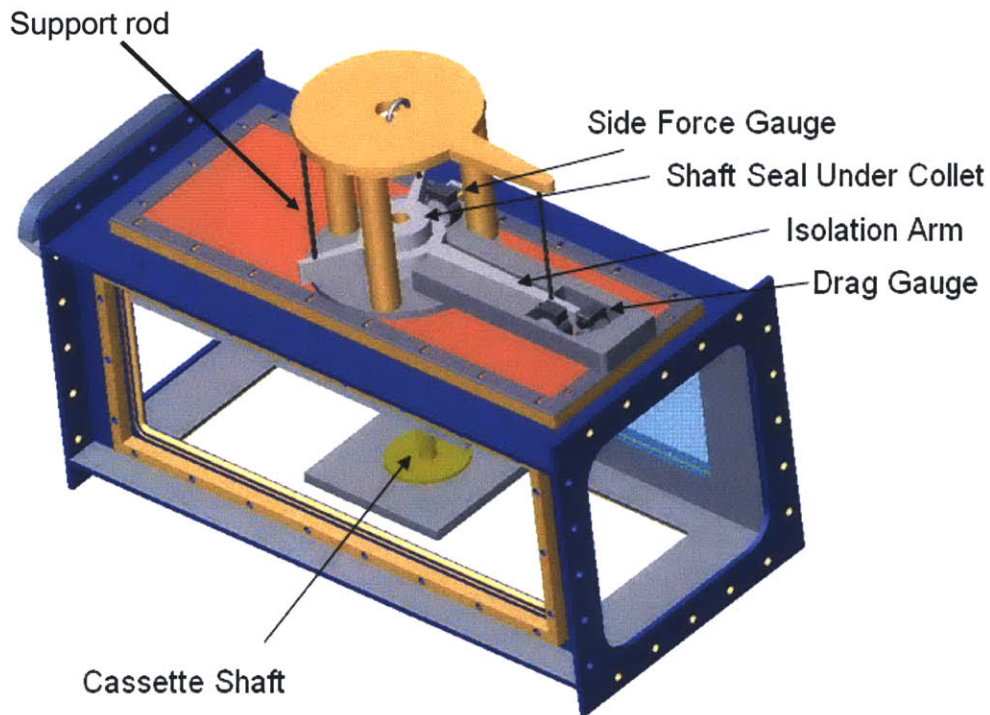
3D model of underside view of dynamometer, base plate, and cassette assembly [1]
